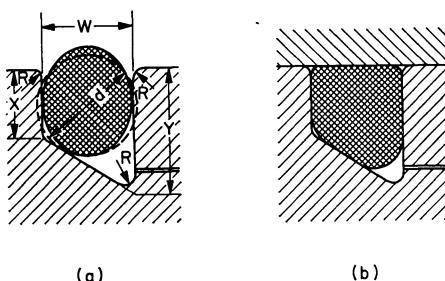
Trapezium grooves for O-rings (dimensions see Table 3.23). Courtesy of Edwards³²⁹
